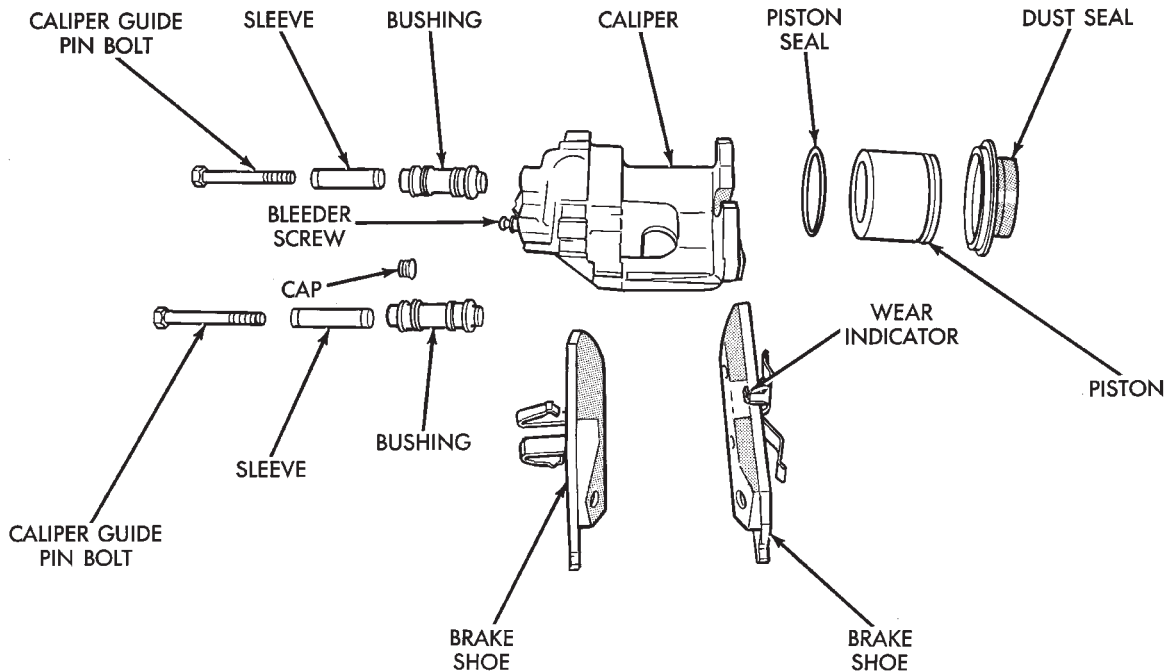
Front Disc Brake Caliper Assembly (Exploded View)
